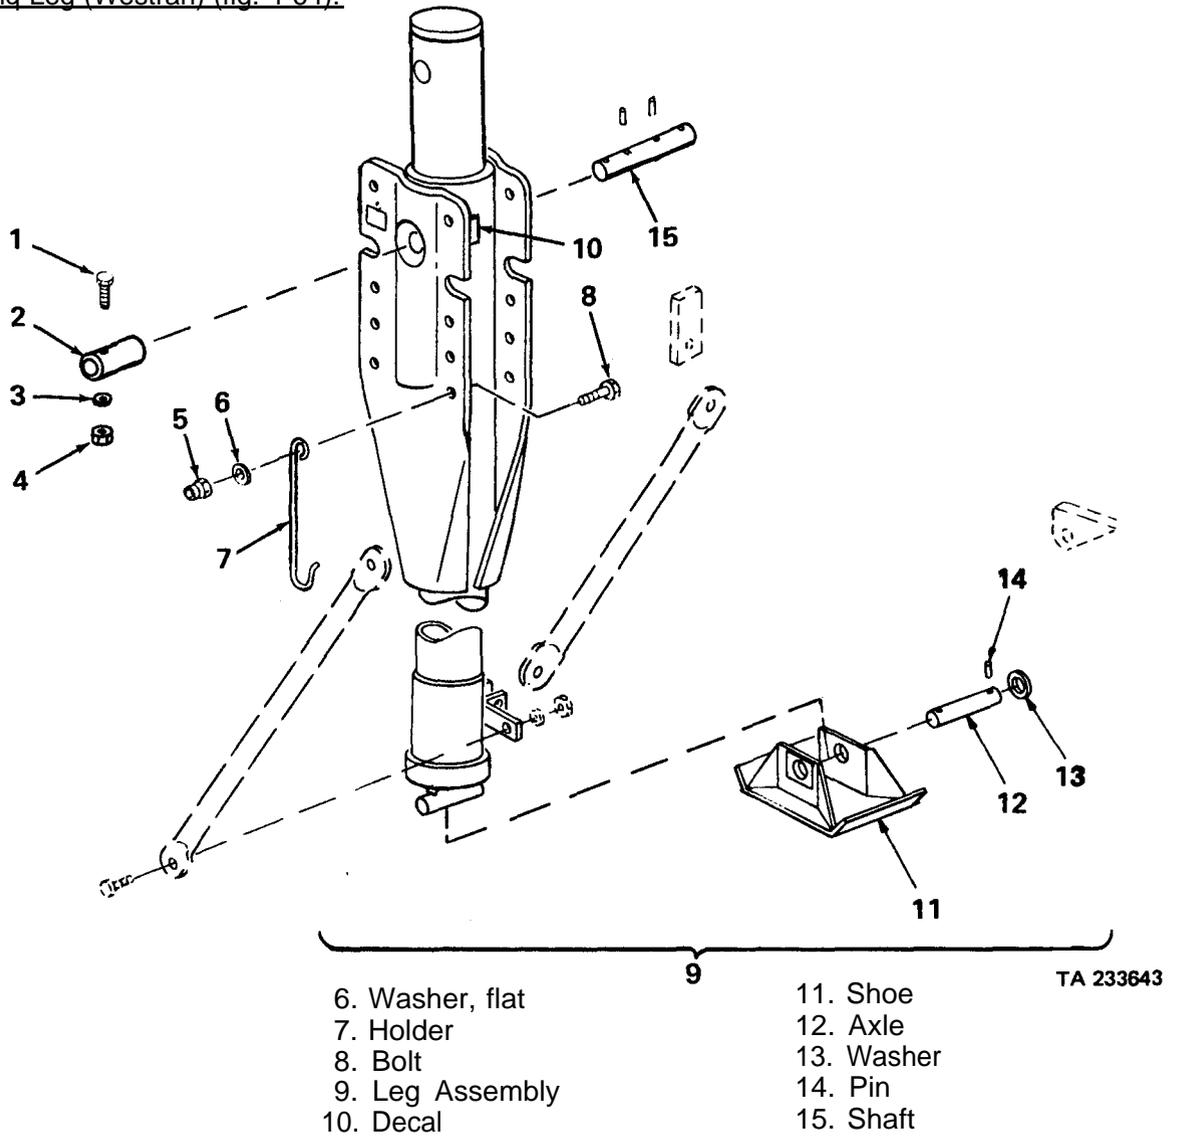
Landing leg disassembly and reassembly (Westran)
